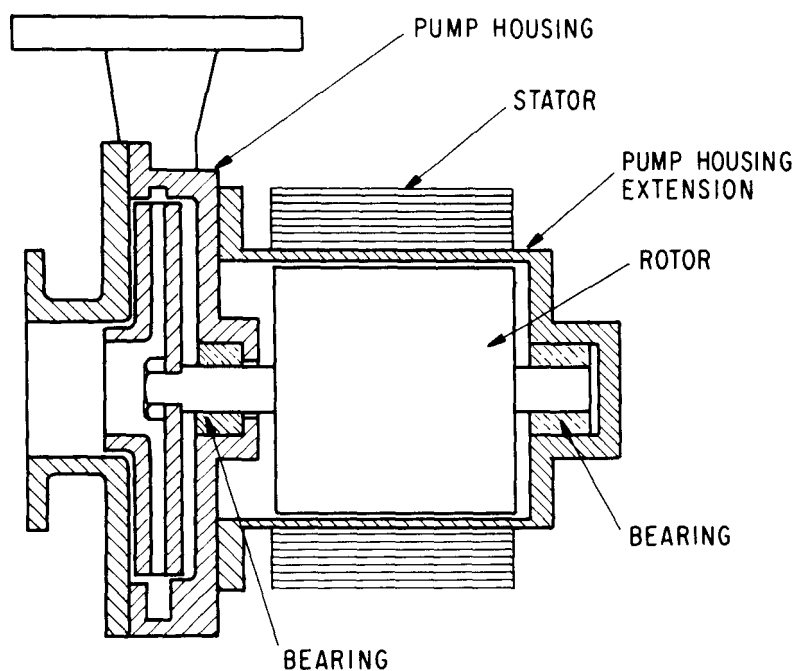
Cross-Section of Canned Wet-Rotor Pump
